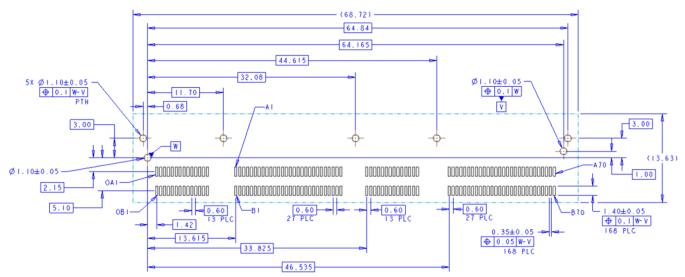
4C+ RIGHT ANGLE CONNECTOR FOOTPRINT (MM)
